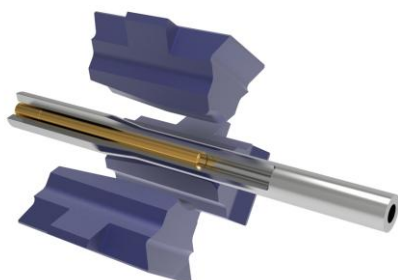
Radial forging is a way to stretch pre-fabricated pipes. Narrow ID tolerances with a fine bore finish are realized by forging the bore onto a precisely finished mandrel (gold colored).
